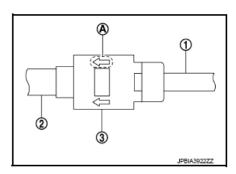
Identifying Rotation Stopper Of Fuel Hose Contact Fuel Pump Courtesy of NISSAN MOTOR CO., U.S.A.
